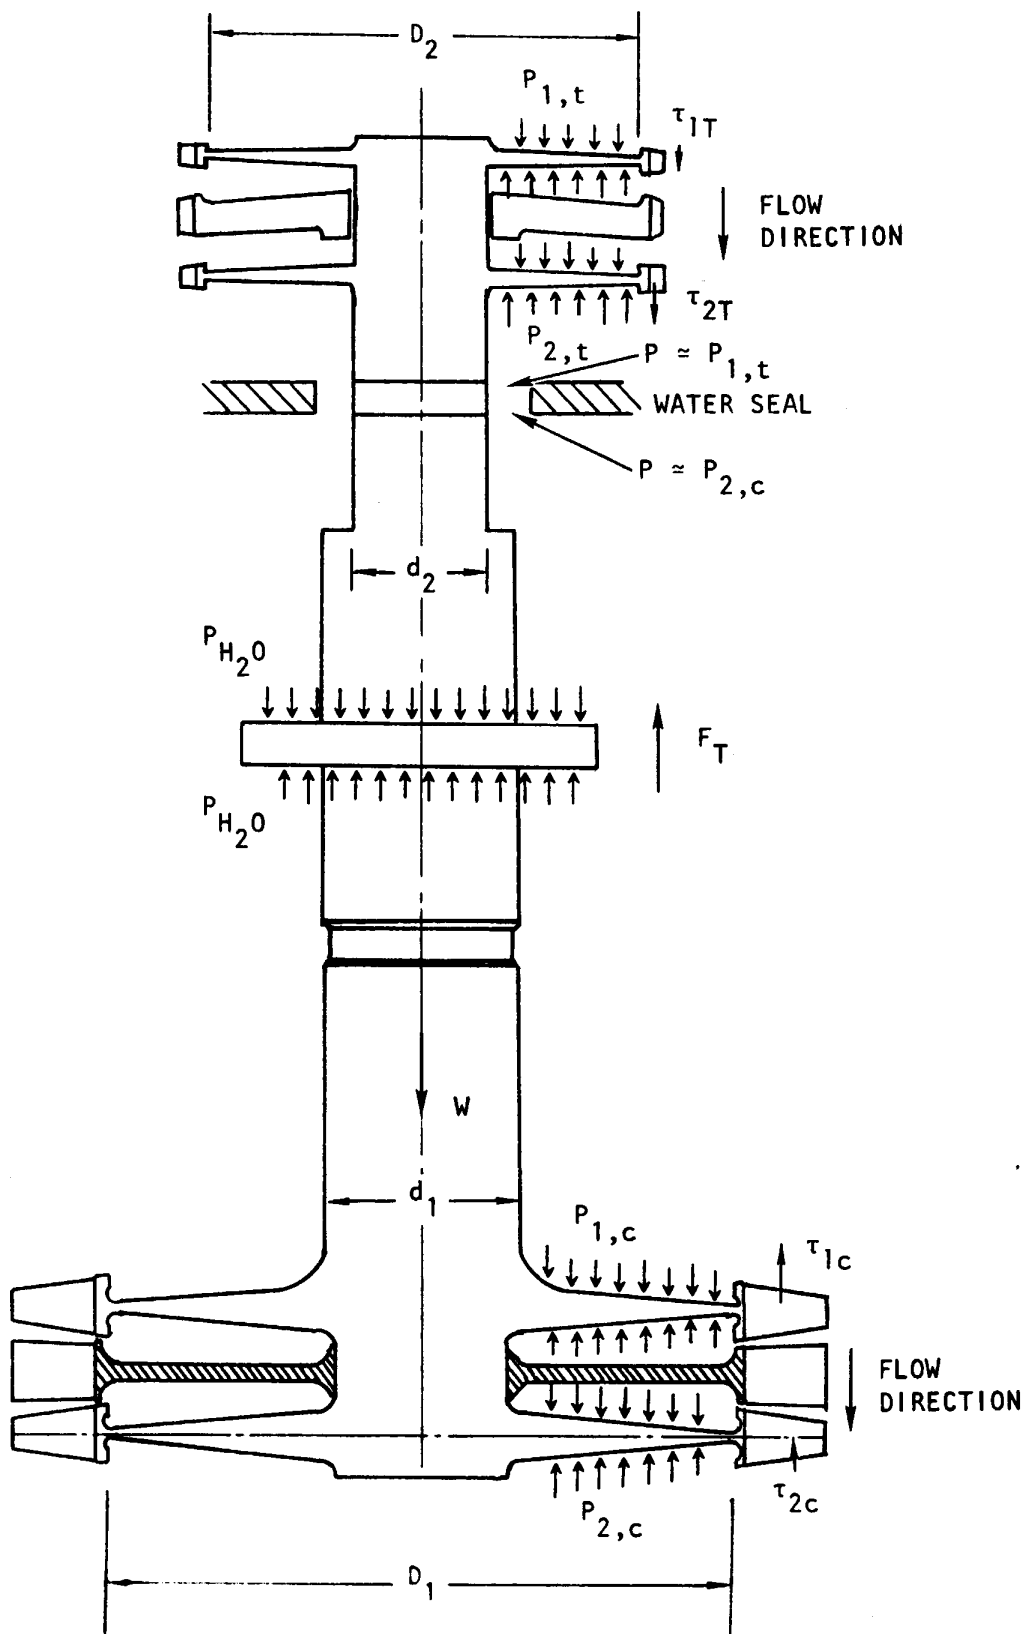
Illustration of loads and dimensions of the rotating circulator components
